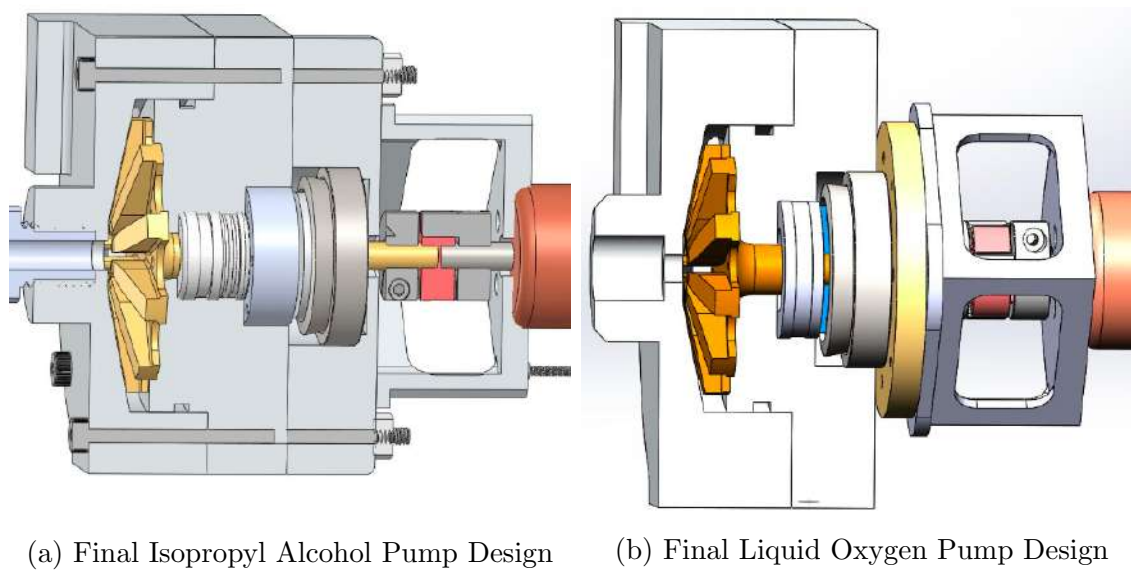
Cross-Section Views of Electric Feed System Pump Designs
